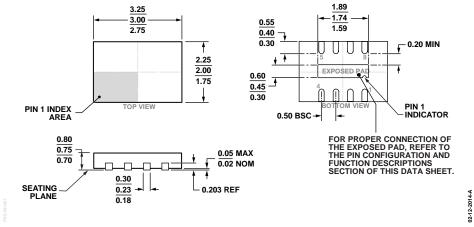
8-Lead Lead Frame Chip Scale Package [LFCSP] 2 mm × 3 mm Body and 0.75 mm Package Height (CP-8-23) Dimensions shown in millimeters
